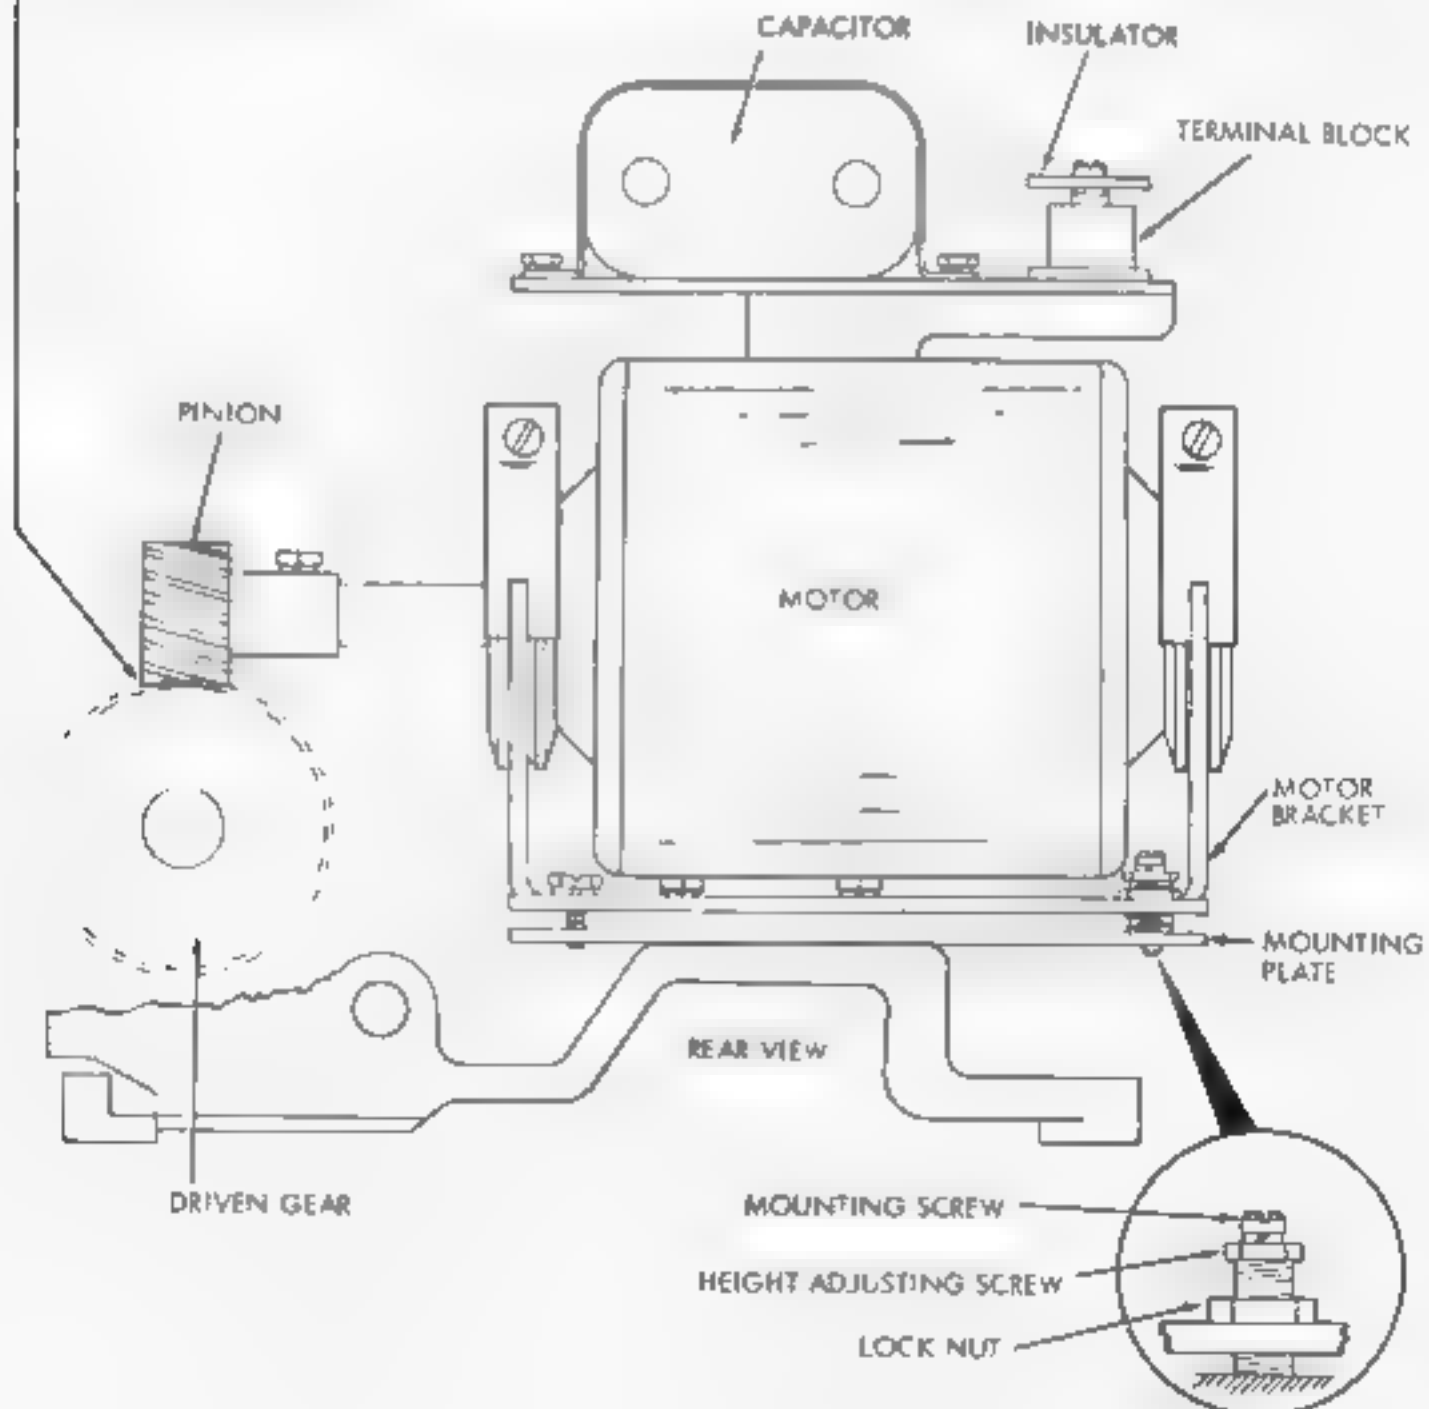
KEYBOARD, PERFORATOR TRANSMITTER MOTOR
